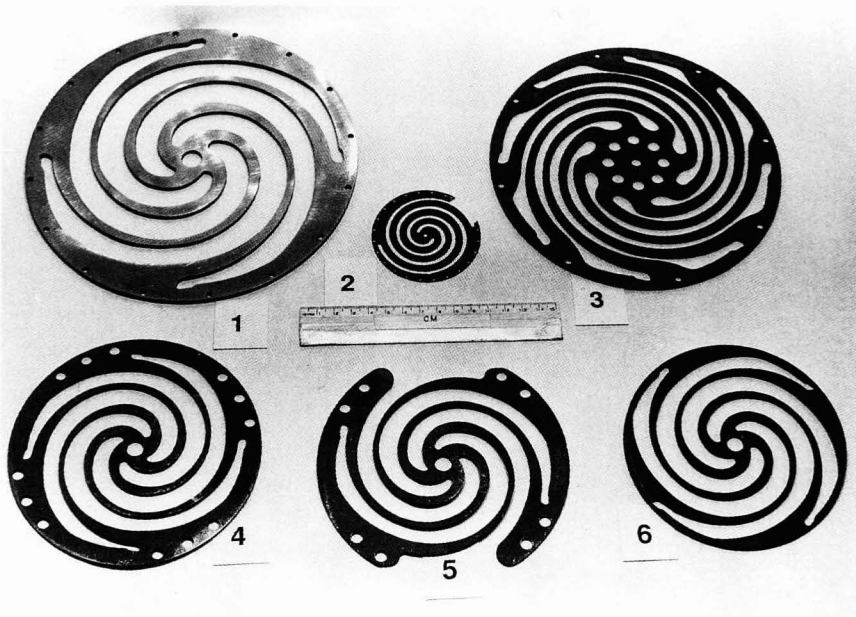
Various examples of planar springs, used in all types of free-piston machines. They are well suited for cost-effective manufacturing by stamping sheet metal.
